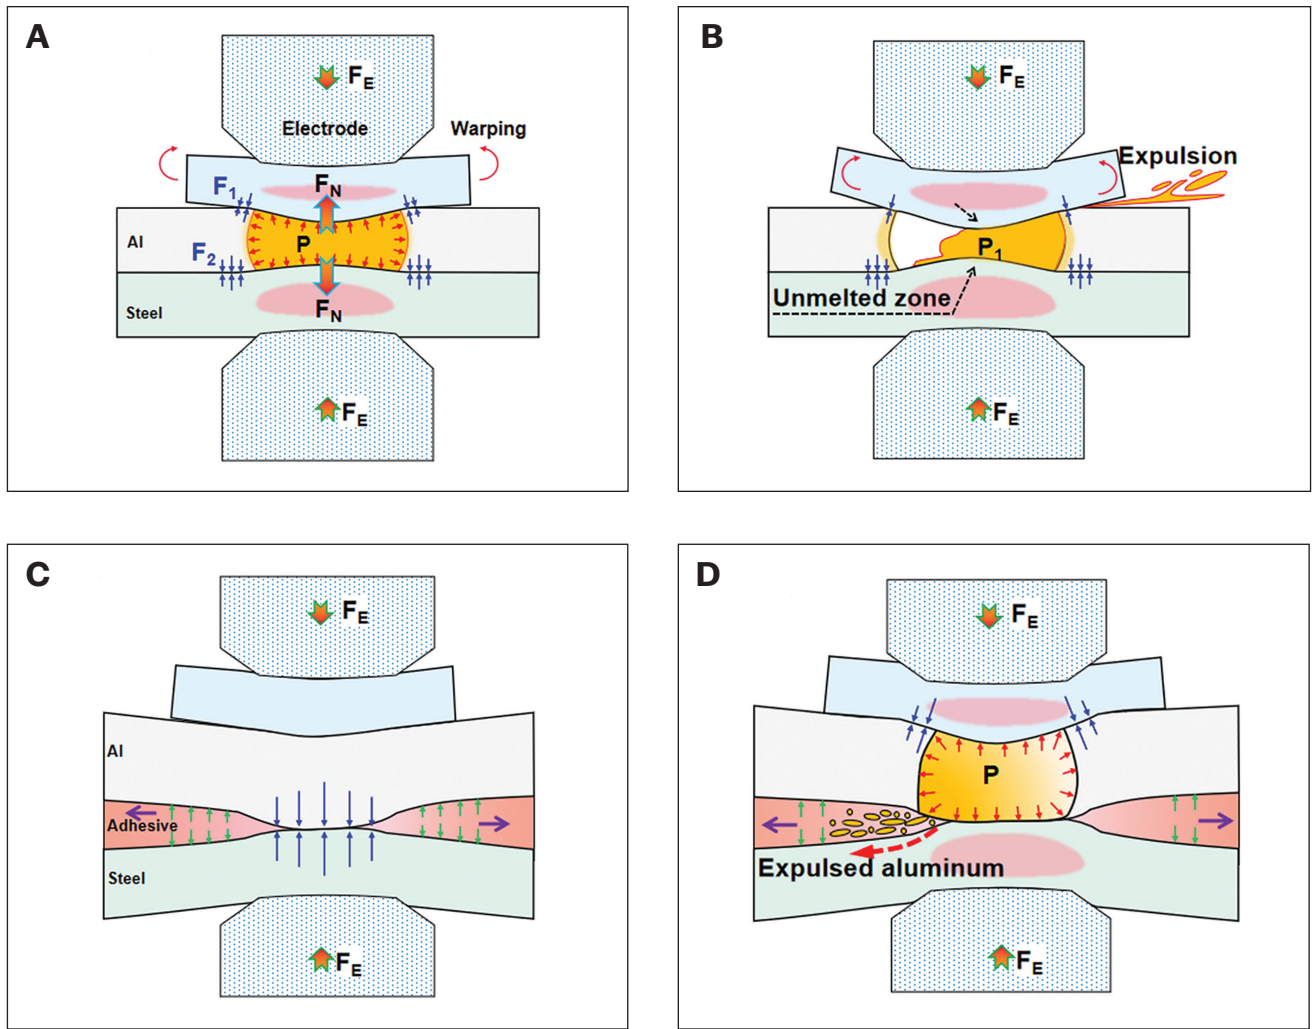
A – Forces acting on the weld during expulsion; B – expulsion process; C – preheating stage with adhesive layer; D – expulsion stage with adhesive layer
